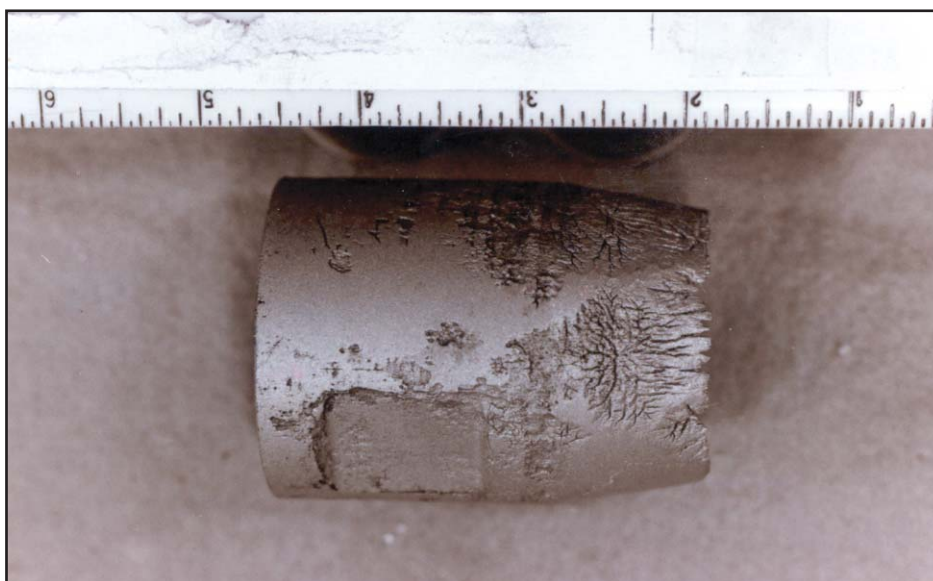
Corrosion Fatigue in Sucker Rod Connectors
